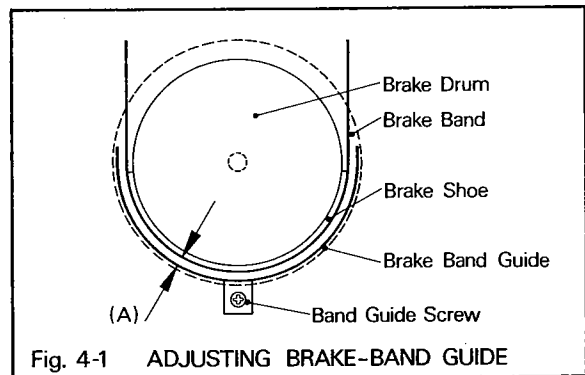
ADJUSTING BRAKE-BAND GUIDE
